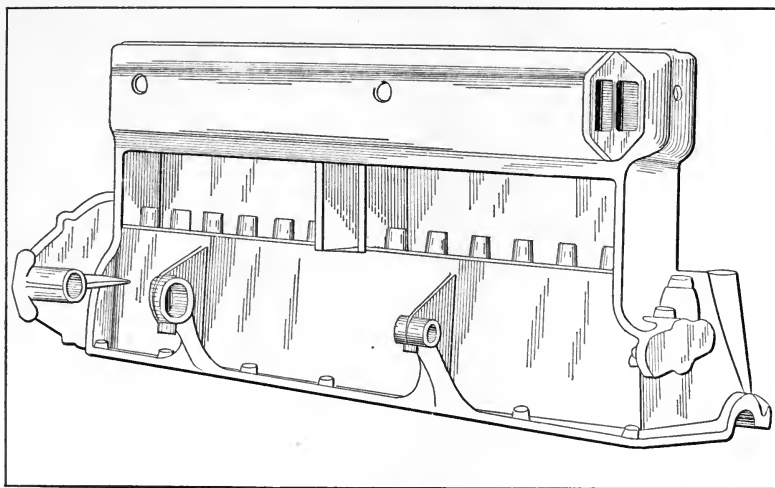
Block Casting of Everitt "Six," a Remarkable Innovation in Motor Design Because Six Cylinders, Upper Part of Crank Case and Inlet and Exhaust Manifolds are Included in One Casting.
